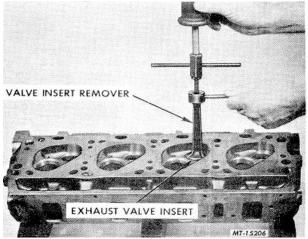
Pulling Exhaust Valve Insert with SE1951 Remover
